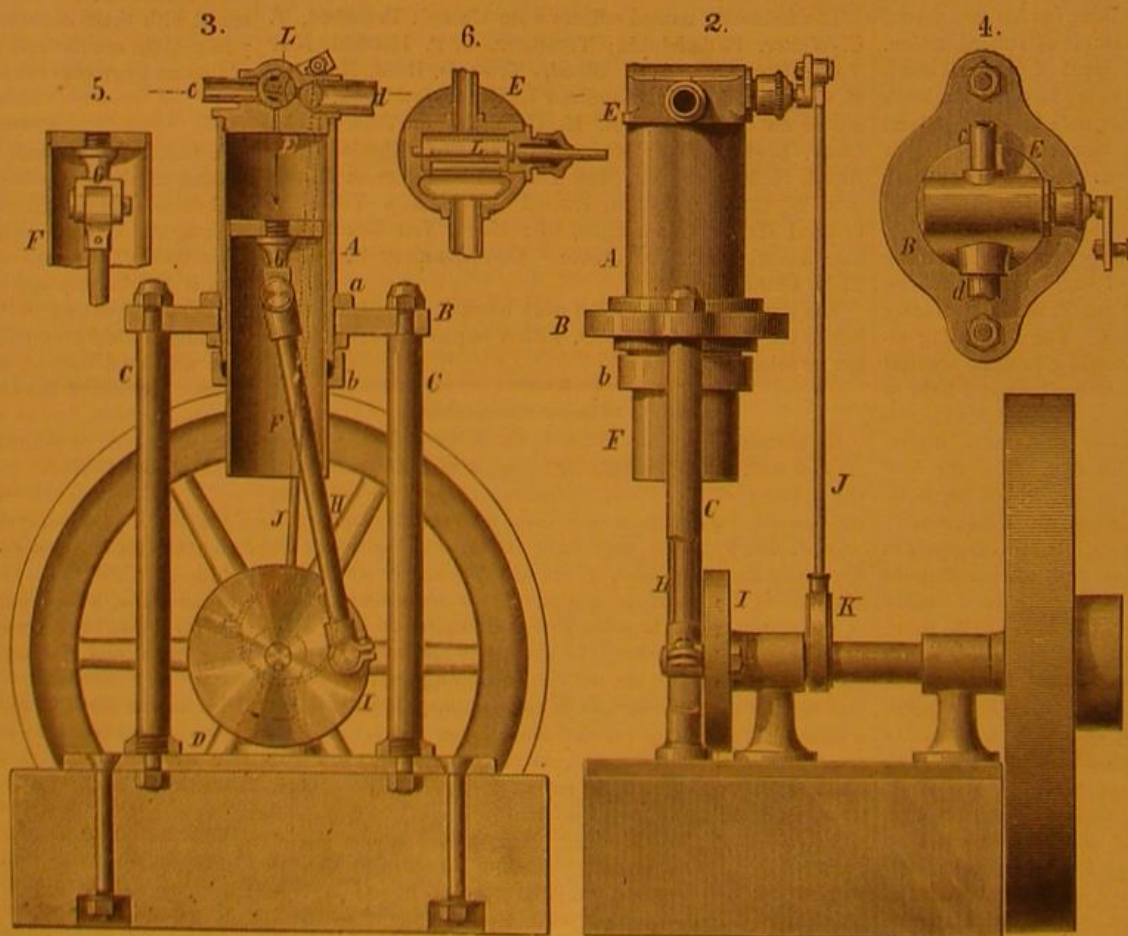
SIMPLE SINGLE-ACTING STEAM ENGINE.
